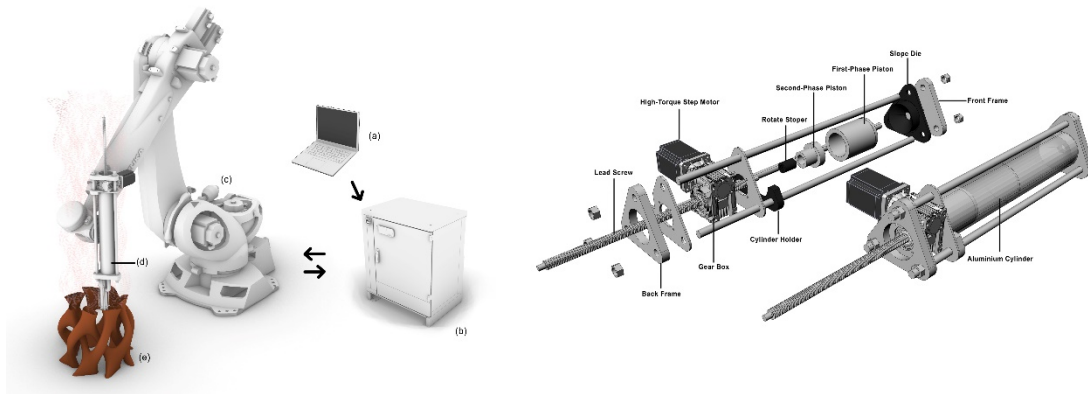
Workcell Setup. Left: Diagram of Setup, (a) Personal computer, (b) Robotic arm controller, (c) Robotic arm as positioning apparatus, (d) Extrusion system and end effector, (e) Printed clay mould. Right: Assembly of clay pump.
